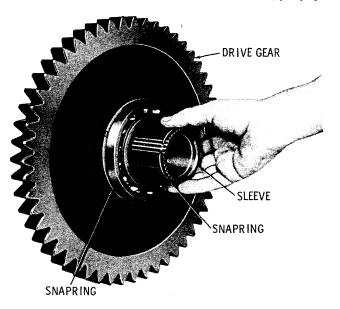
Installing high-range sun gear sleeve into transfer drive gear
